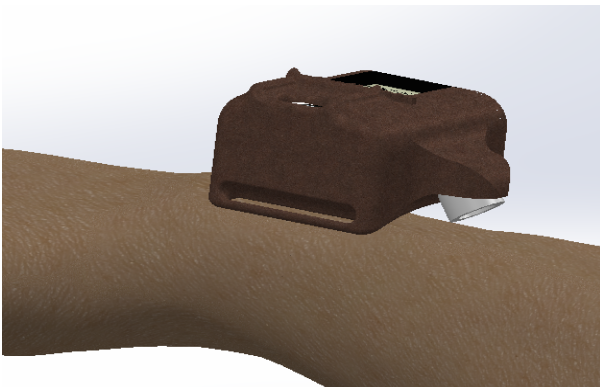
Side View of Vital Band with Surface Sensor (Shown in gray at the bottom)
